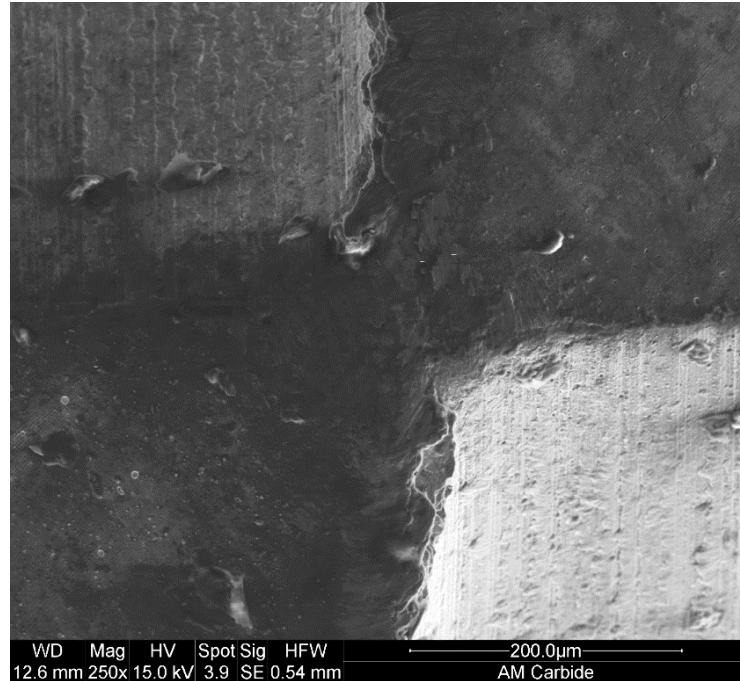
250x SEM top down view of the carbide drill bit chisel edge after drilling 60 holes in AM titanium.
